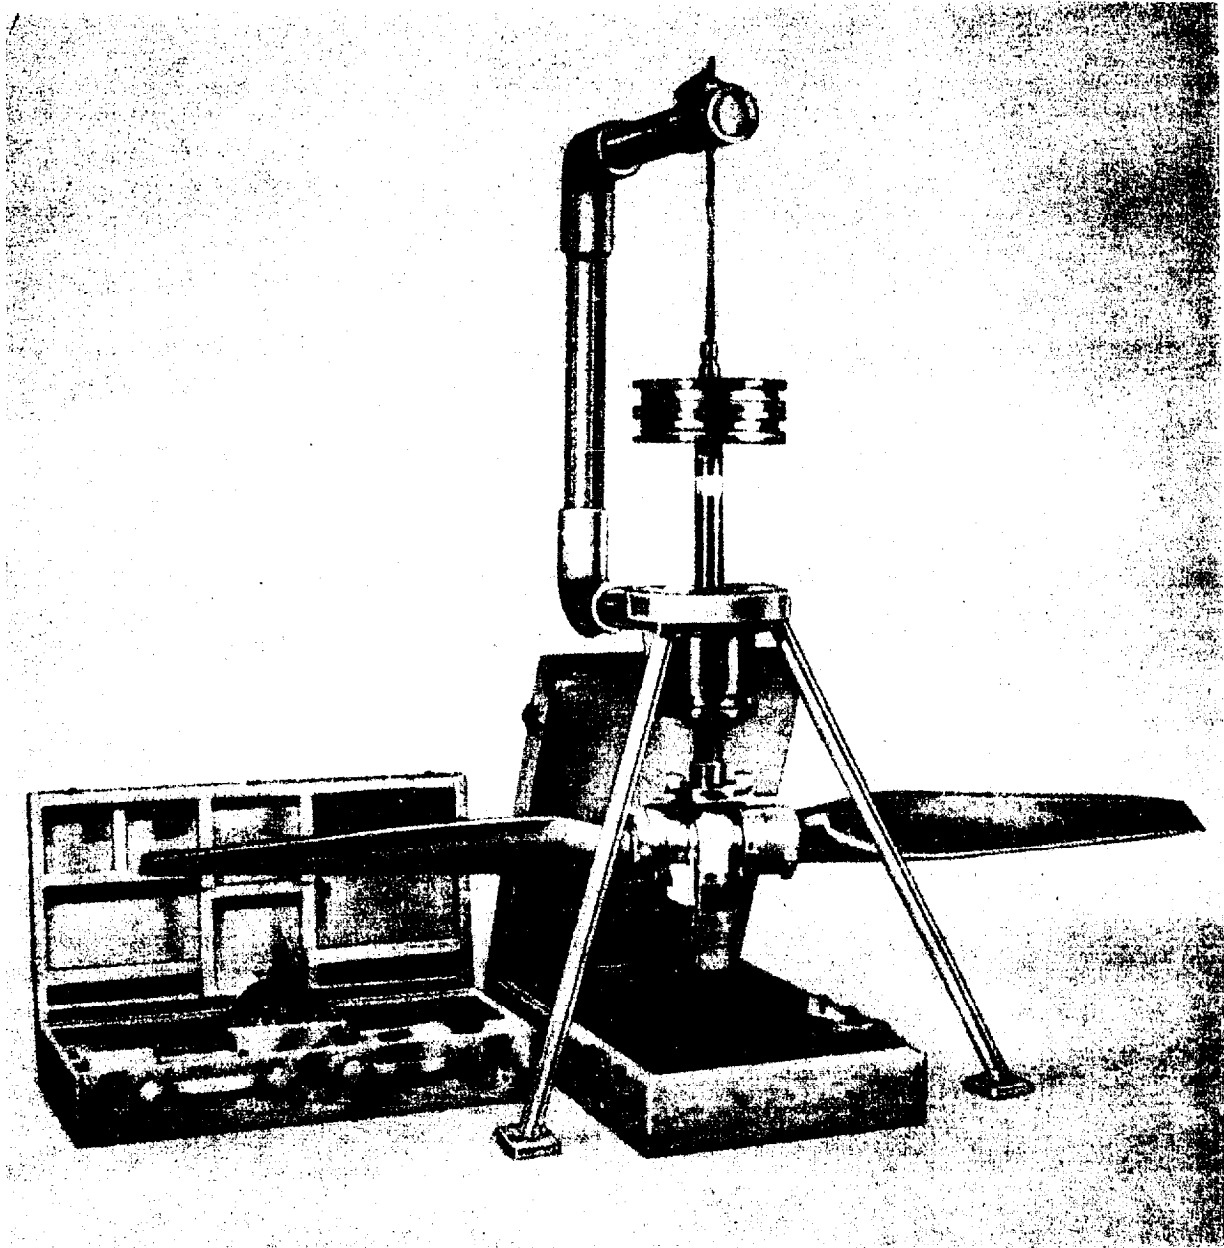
Typical Suspension - Fixed Pitch Flange-mounted Propeller Assembly.
